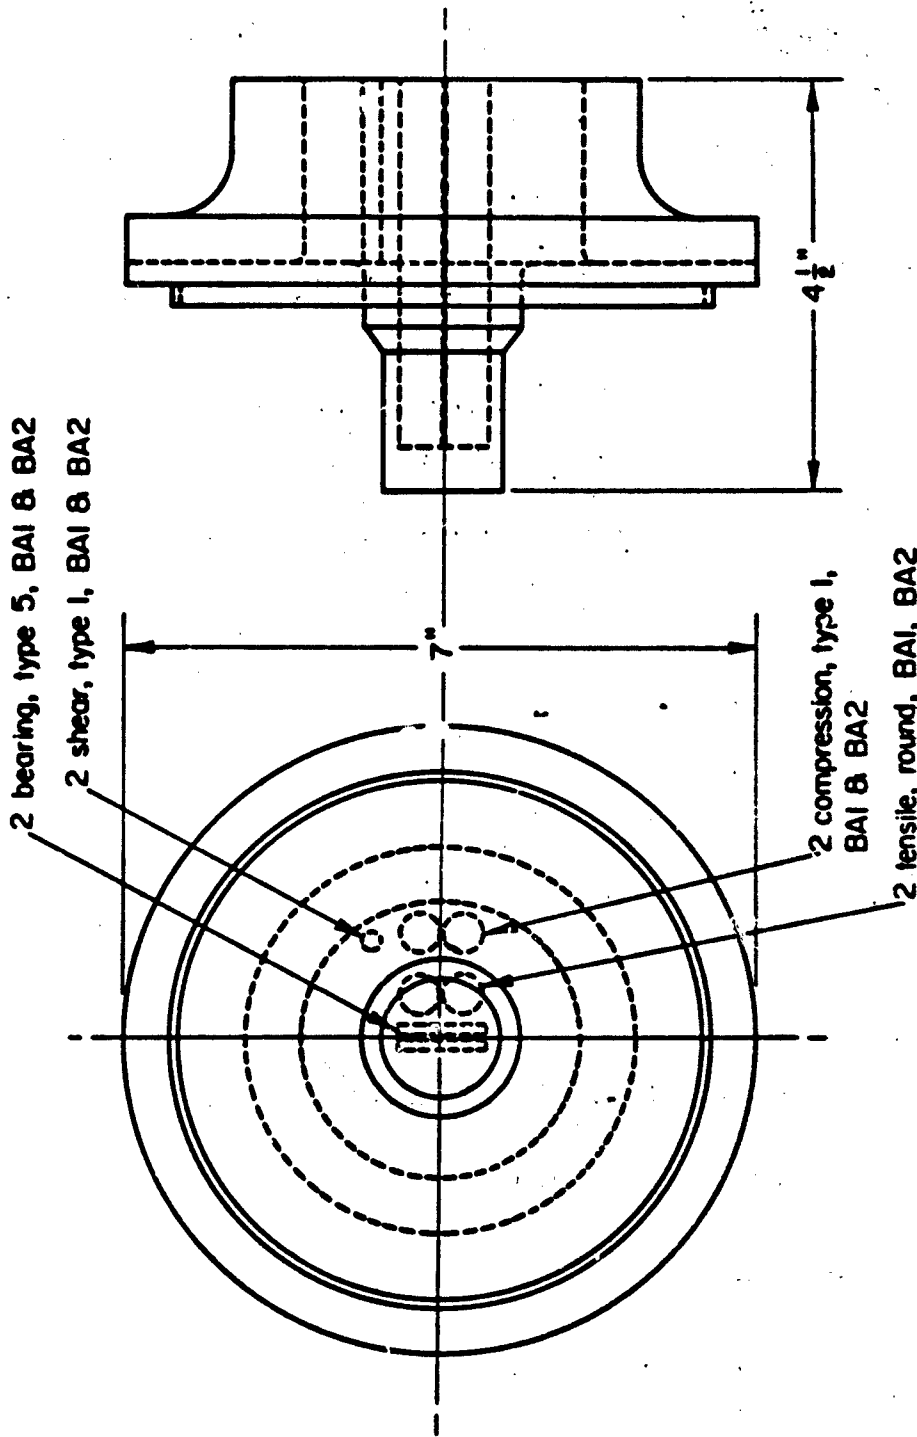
LOCATION OF TEST SPECIMENS FOR CASTINGS BA AND BB
